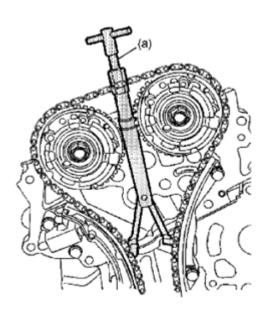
Identifying Special Tool Courtesy of SUZUKI OF AMERICA CORP.
